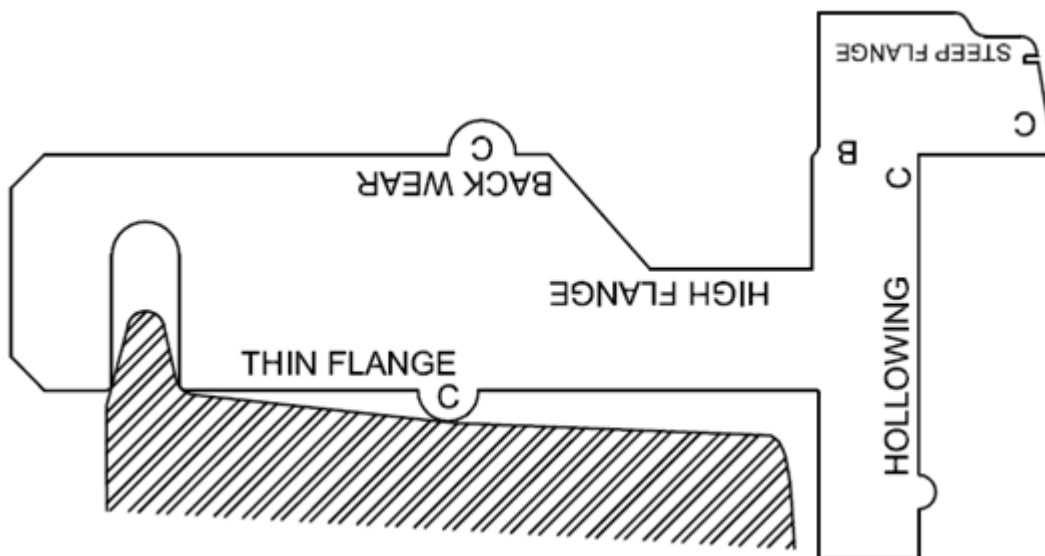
Wheel Condemn Gauge - Thin Flange Indication
